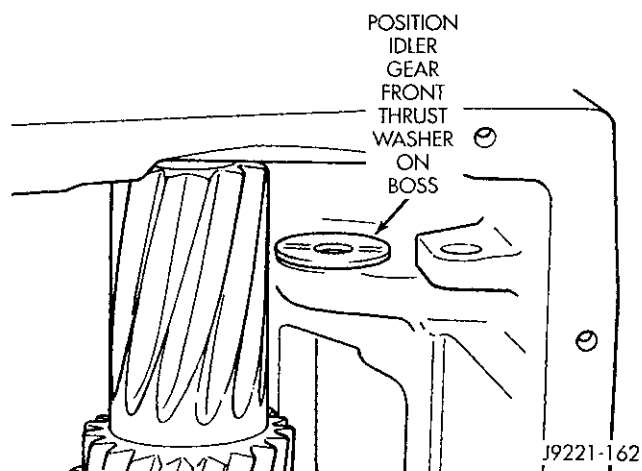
Positioning Idler Gear Front Thrust Washer In Case
